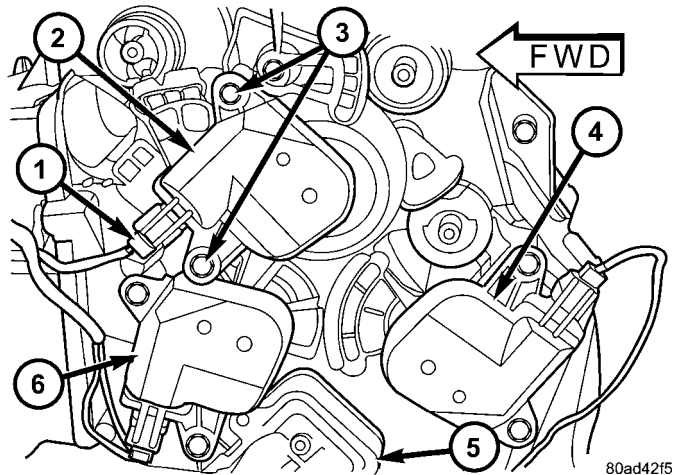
Blend Door Actuator - LHD Shown, RHD Typical
